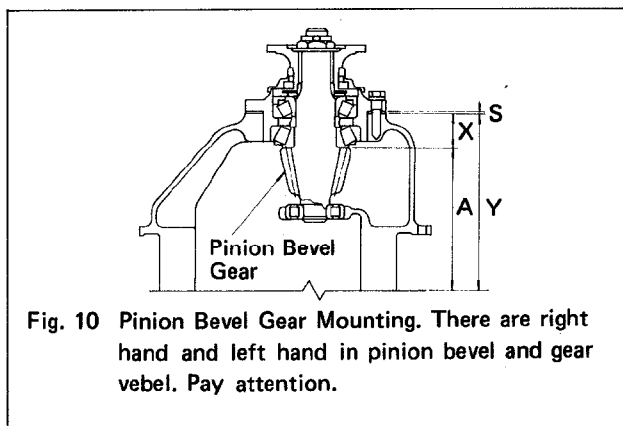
Pinion Bevel Gear Mounting. There are right hand and left hand in pinion bevel and gear vevel. Pay attention.
